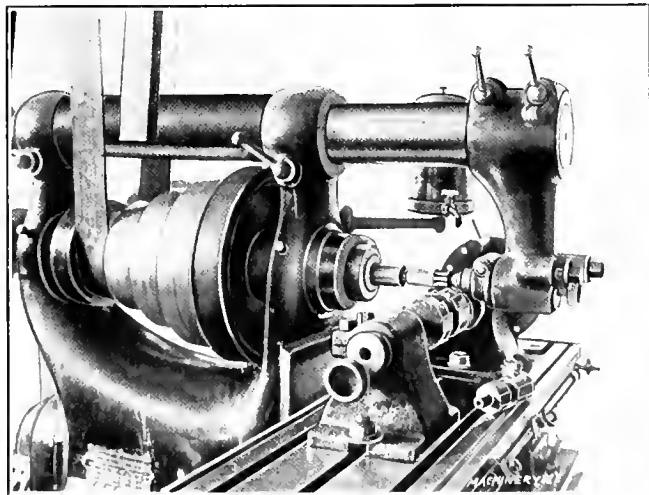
Milling the Cam Surface on the Cam Bolt.
